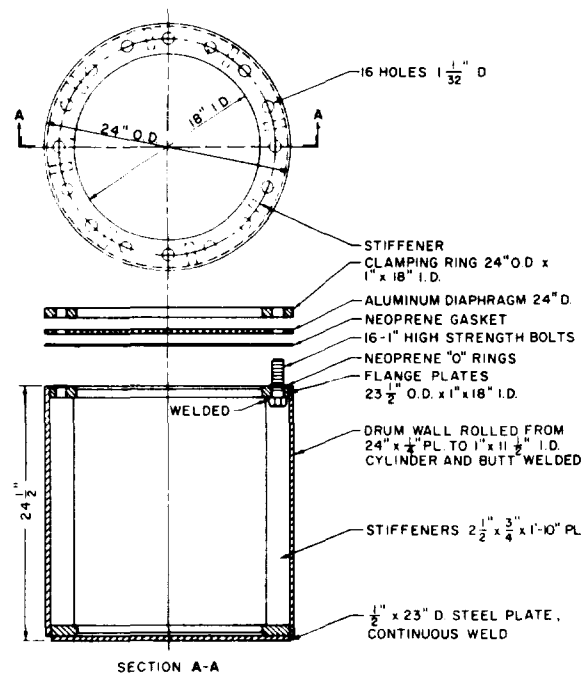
PLAN AND SECTION OF TEST DEVICE
